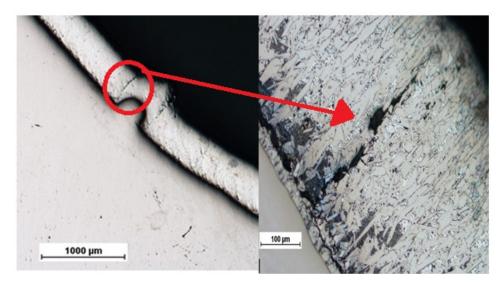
Specimen No. 10, deep crack in notch area close to weld toe.
